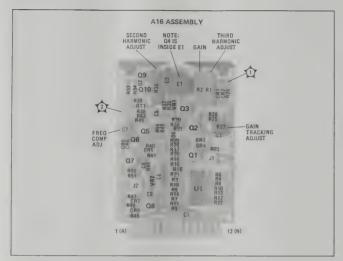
A16 Phase Modulator Driver Assembly Component and Test Point Locations
